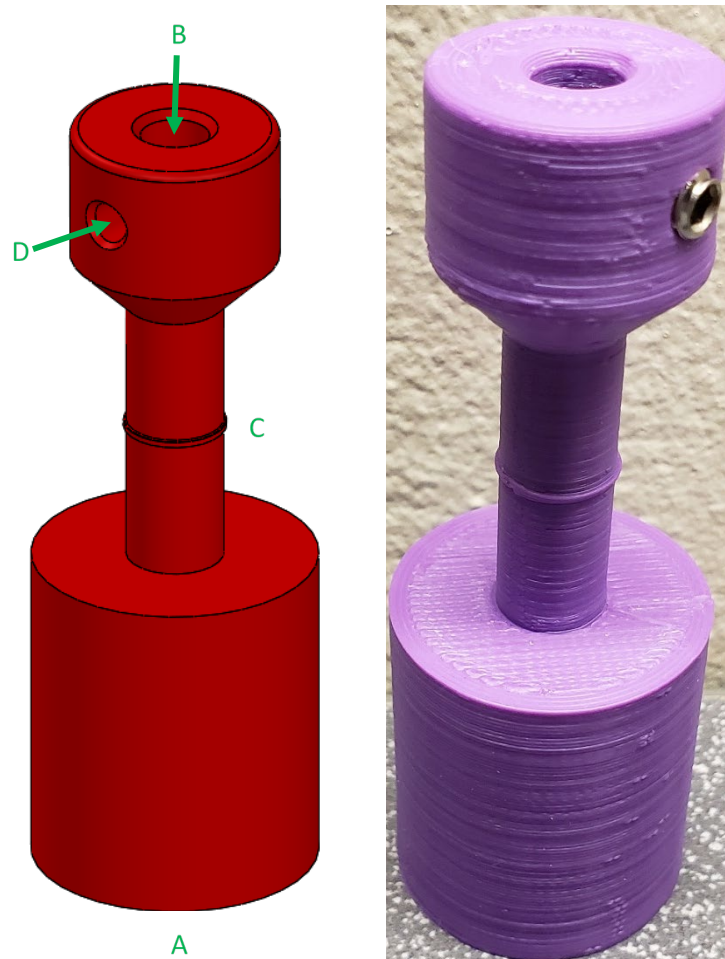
CAD of the version 1 cylinder end effector and a 3D printed prototype. This part is approximately 2.9” tall with a diameter of about 1”.
